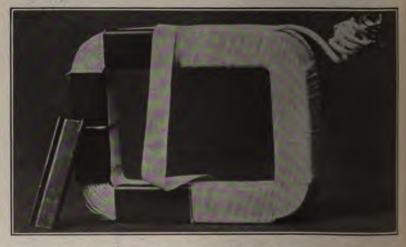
Showing Partly Taped High-Tension Coil with Insulating Channels
